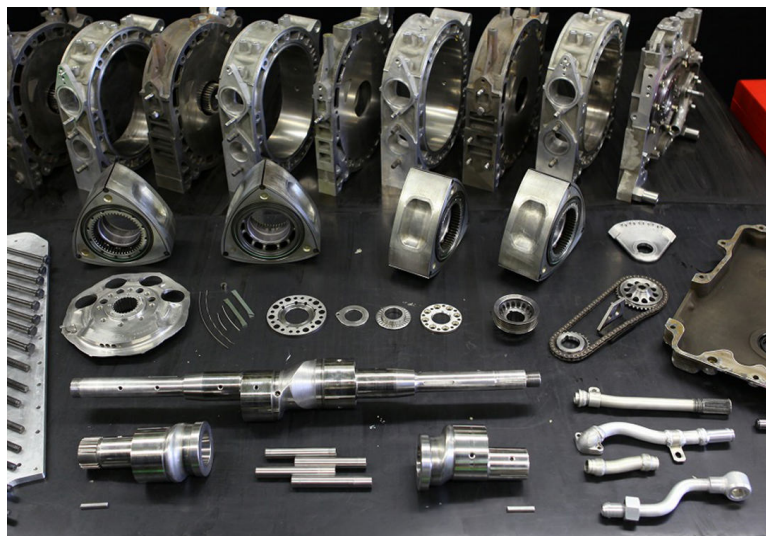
Transformation of the Racing Rotary Engine (RE) (mazda.com)Mazda R26B 4 Rotor Wankel Engine Parts explosion
